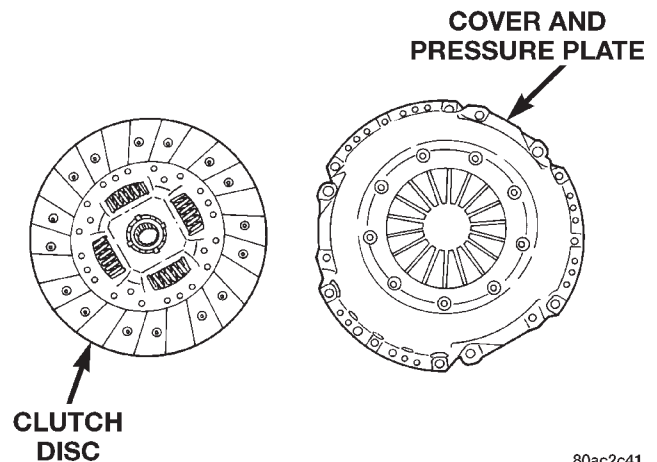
Modular Clutch Assembly — 2.0L and 2.4L CLUTCH ASSEMBLY (2.5L DIESEL)
